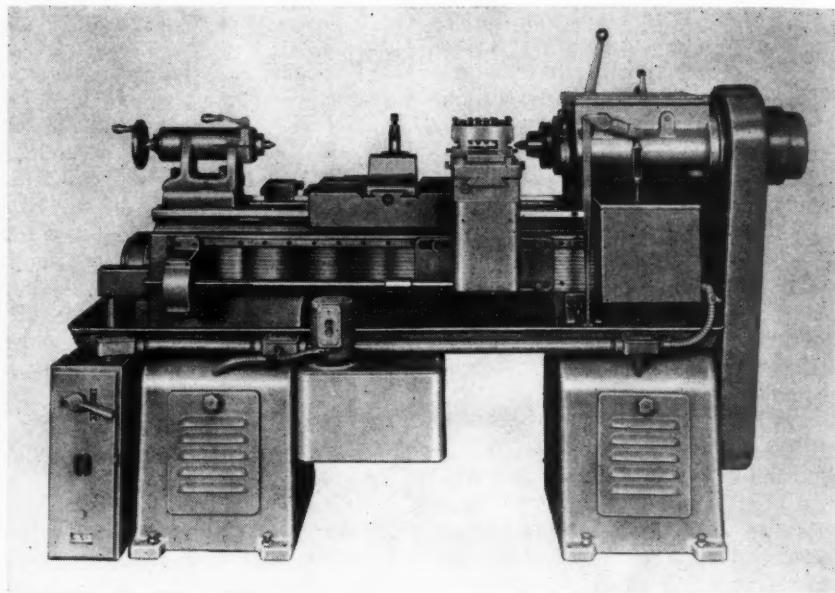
Rear view of "Clipper" automatic lathe, showing automatic back-facing attachment, coolant pump and tank, and spindle clutch operating solenoid
